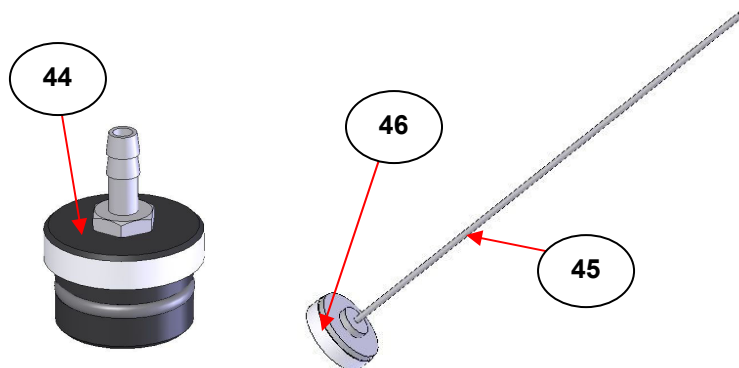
VT Cell Bung and Mushroom Piston Assembly
